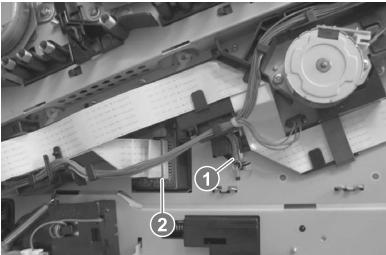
Remove the laser/scanner assembly (C/K; 1 of 5)
